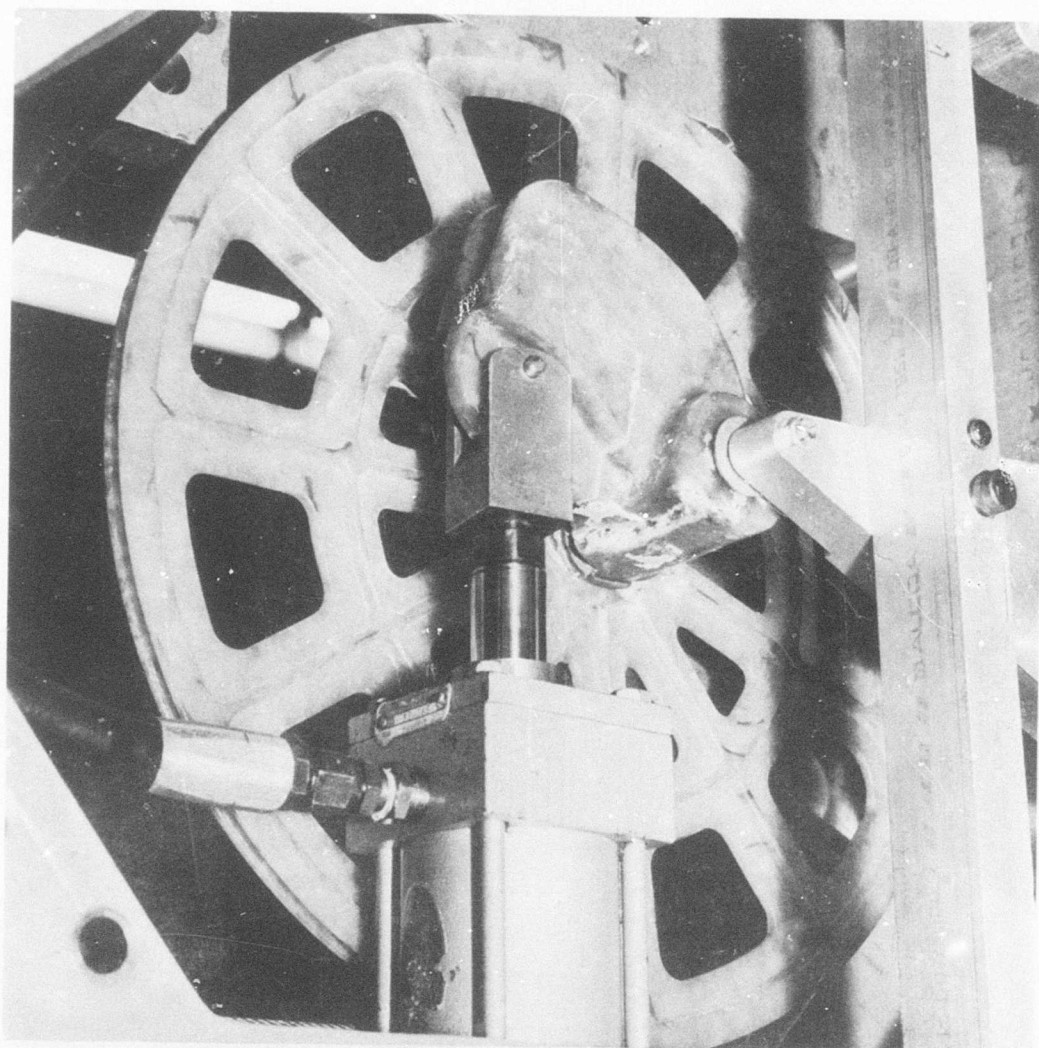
Quadrant Assembly Loaded to Failure - Crack Propagation Test.
